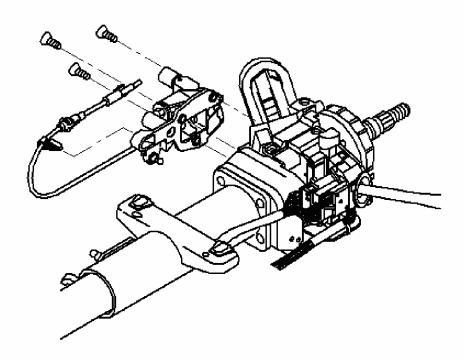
Flat-Head 6-Lobed Socket Tap Screws & Linear Shift Assembly Courtesy of GENERAL MOTORS CORP.
